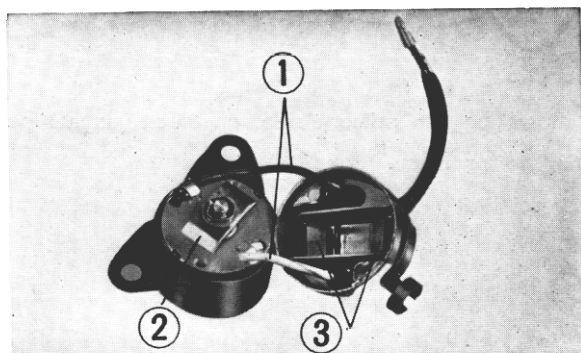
Disassembly of magnetic switch (cap is opened)
